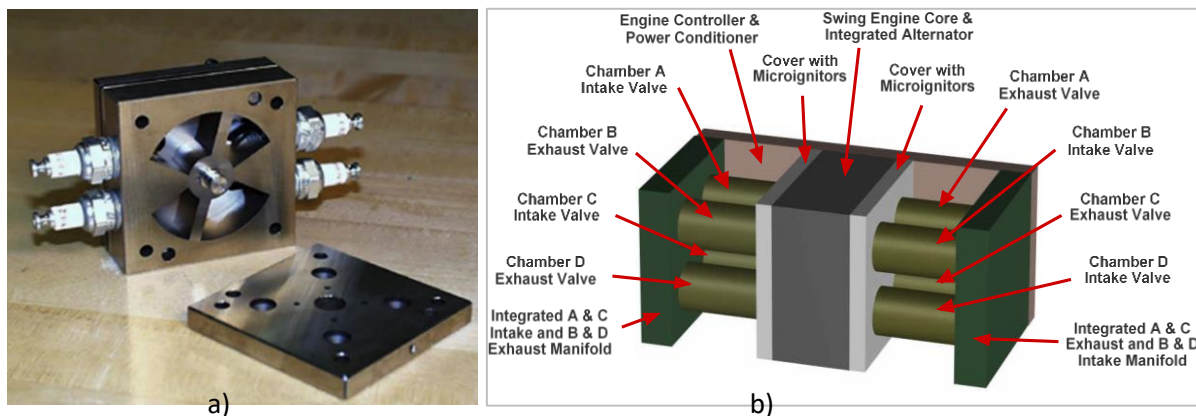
a) Meso-scale Internal Combustion Swing Motor (MICSE). b) Assembly concept for all non-fuel components of the 20W MICSE chemical-to-electrical energy conversion system indicating major system components [78].
